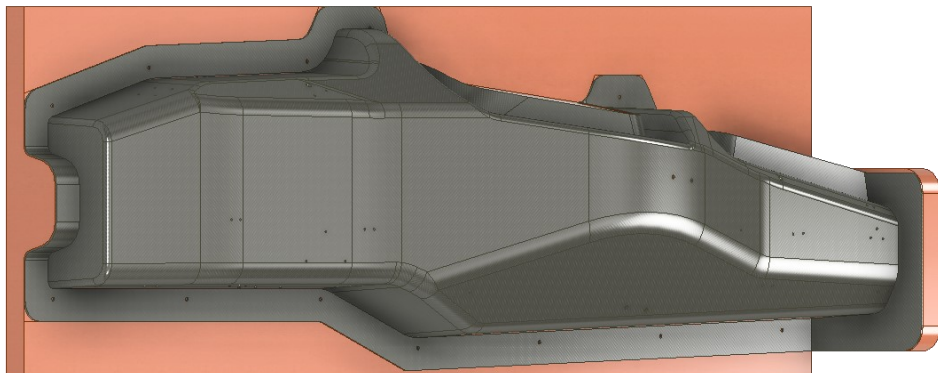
CAD Designed left side negative mould including its positive mould.
